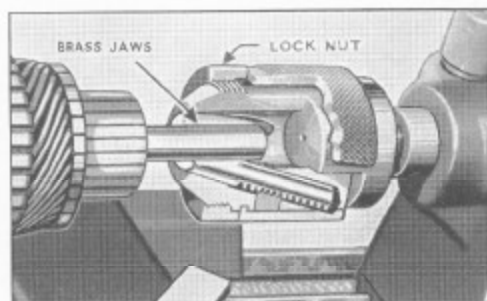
Cutaway view of special chuck used in tailstock of lathe for supporting armature shaft.
